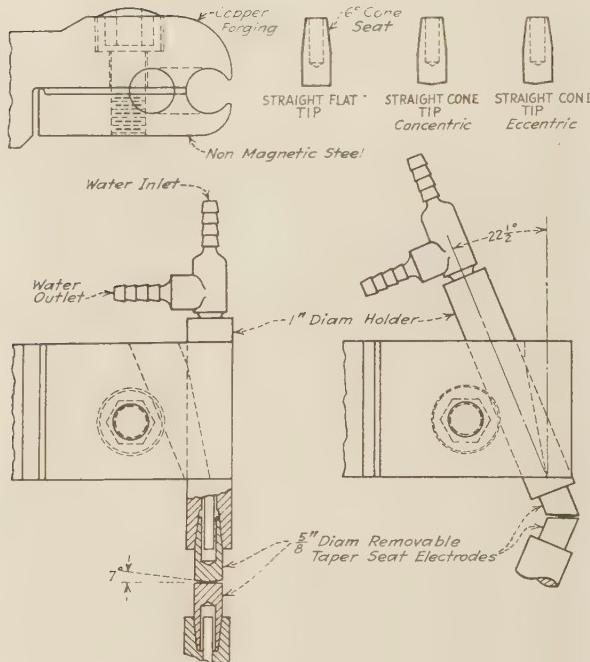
SPOT WELDING TIPS AND HOLDER
